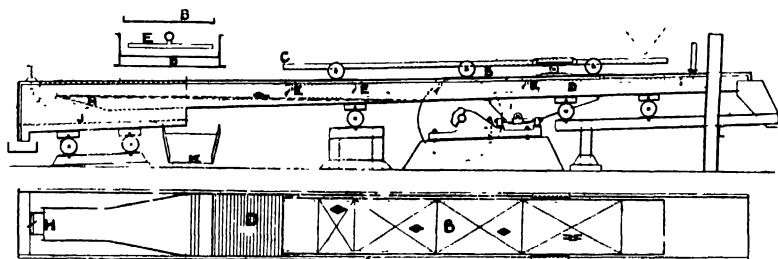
The Notanos Washer. Elevation, Plan and Cross-section.
